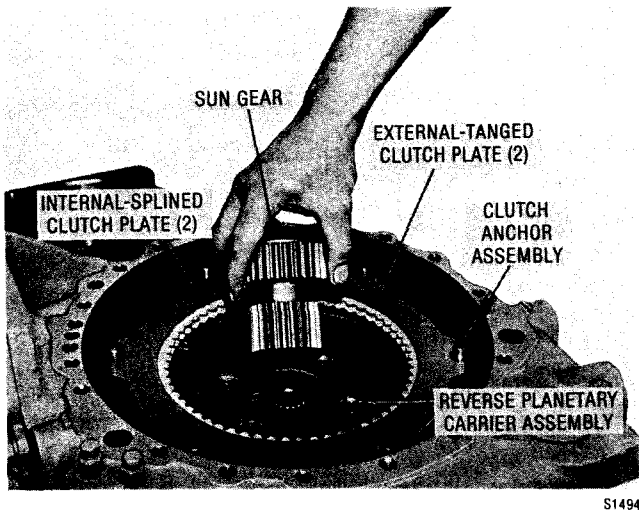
Installing forward-and-reverse sun gear (TRT 2211-3, 2411-3)
